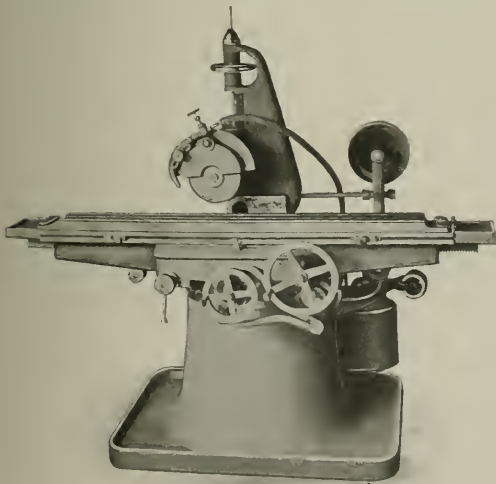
The Bath Grinder arranged for Surface Grinding.
